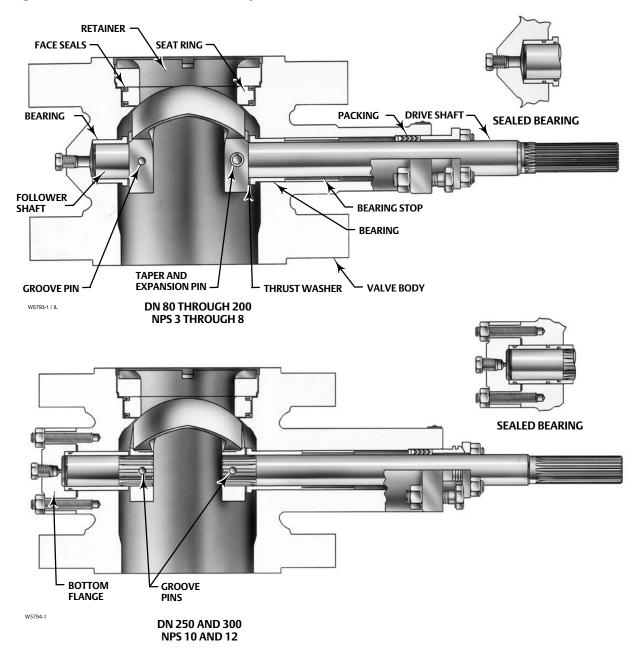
Sectionals of Fisher CV500 Rotary Control Valves
